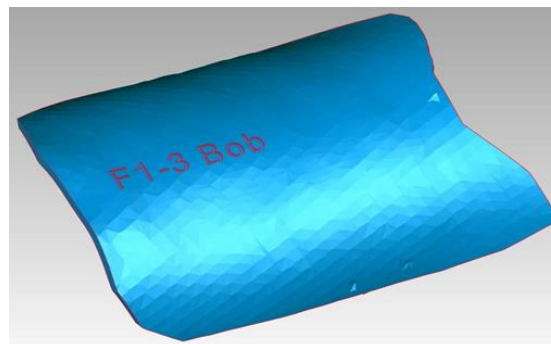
Unique markings can be applied to each scale to identify the user and the scale location on the glove. The parts are then saved in a 3D CAD format that can be read by a 3D printing machine (source: WYSIWYG photo)
